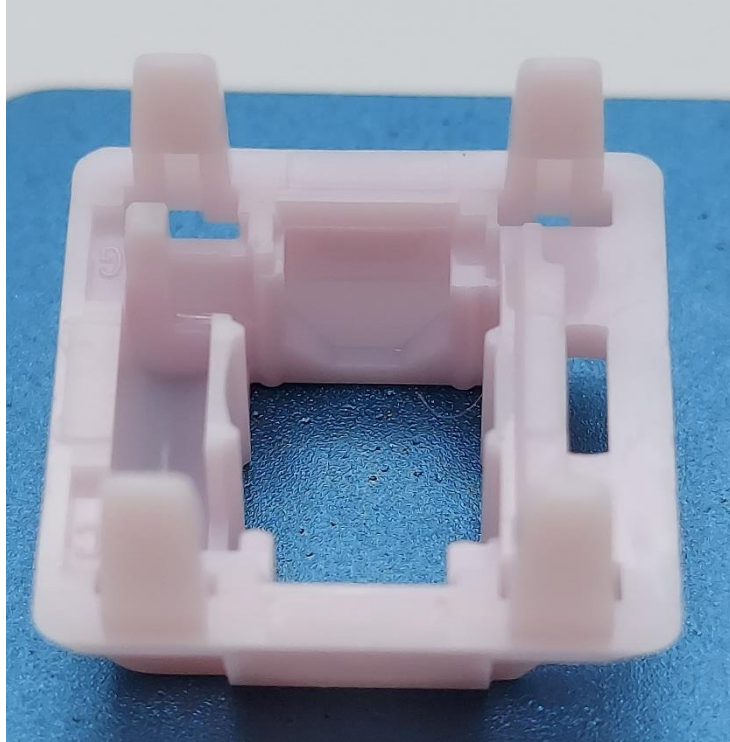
Internal of Konpeitou bottom housing showing two letter mold markings (left) and shortened LED access slot (right).
